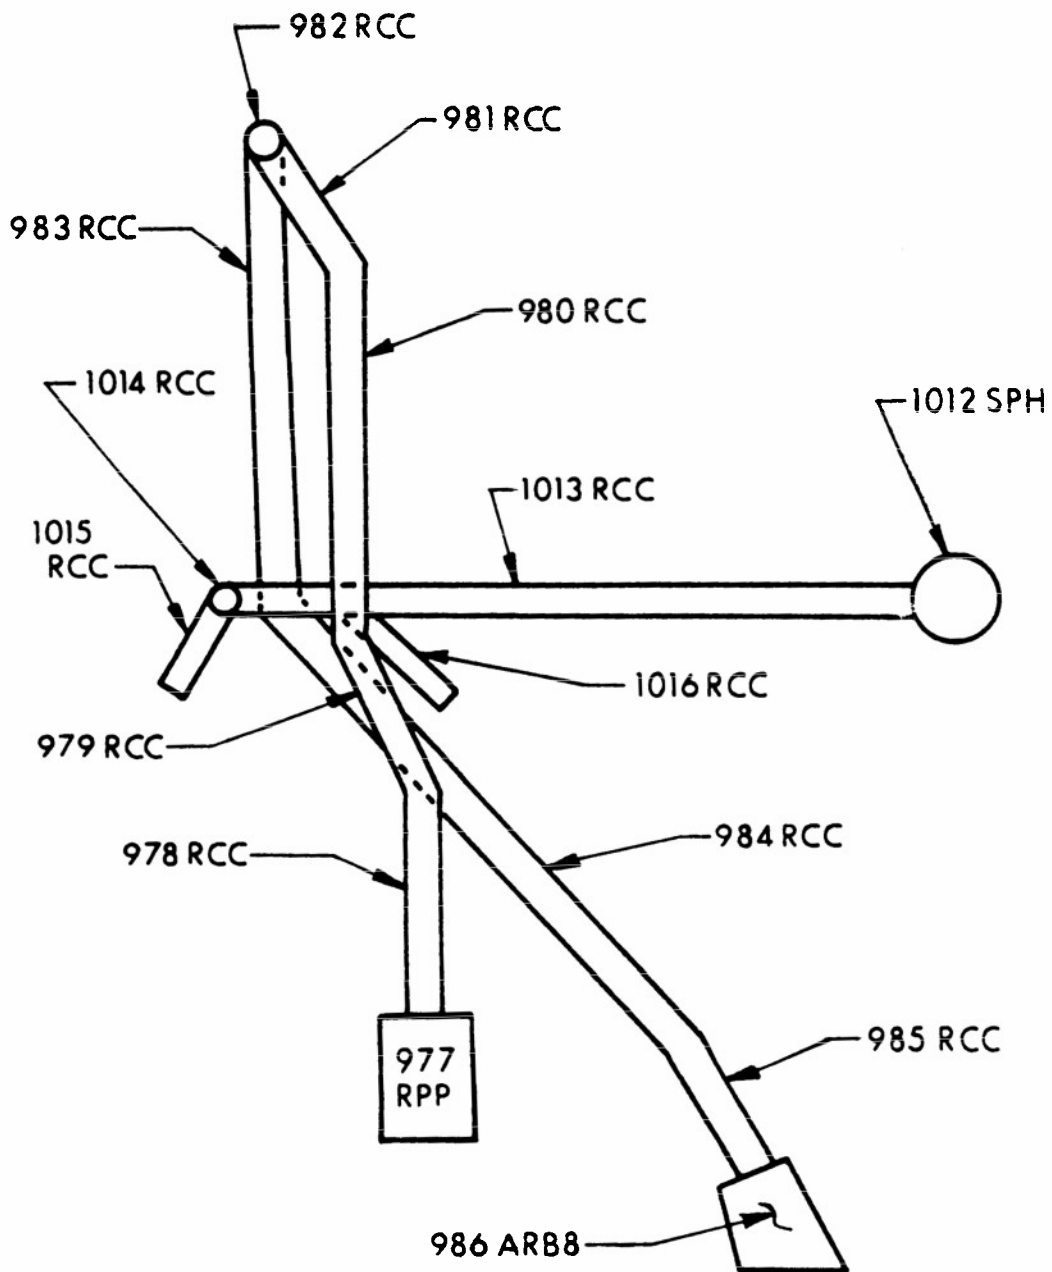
Solids used to Describe Fuel Components of the Black Hawk.
